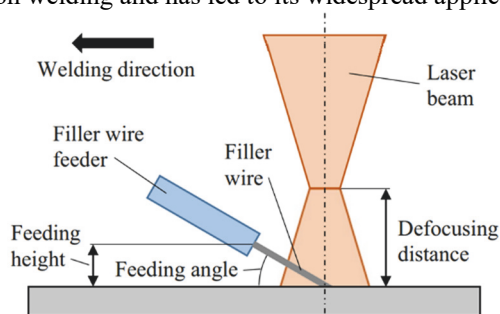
Technical schematic diagram of the new generation of laser filler weld splicing plate [4]
